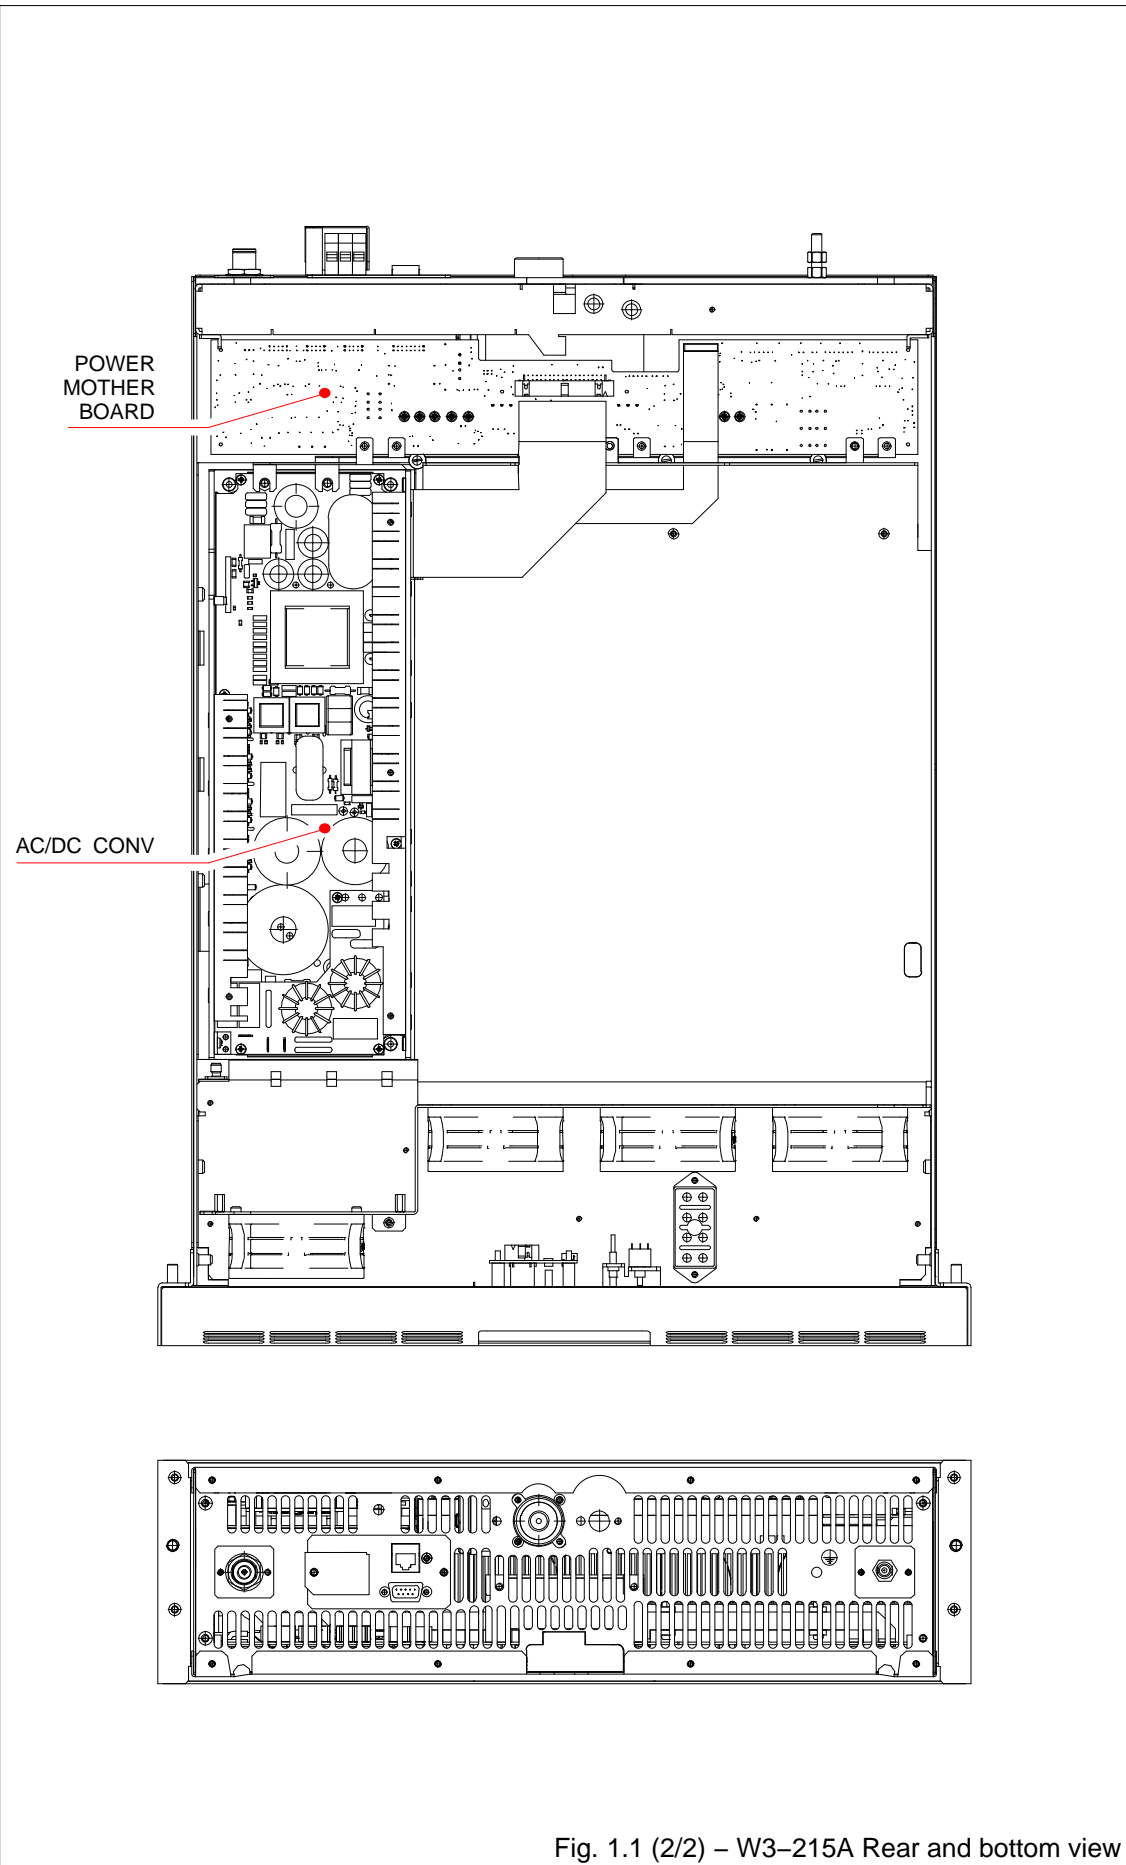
(2/2) – W3-215A Rear and bottom view
